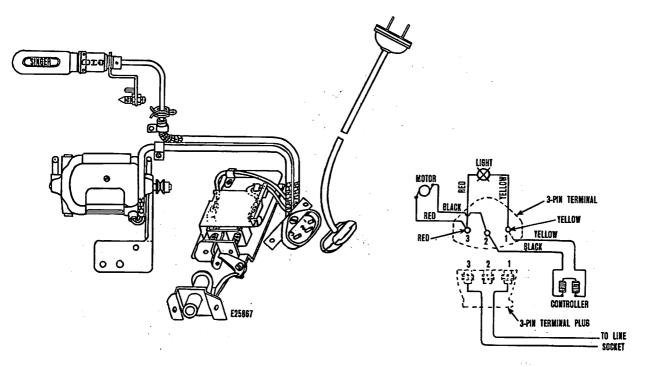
Wiring Diagram for BU107S Motor on 24-68 Machine in Portable Set No. 205
